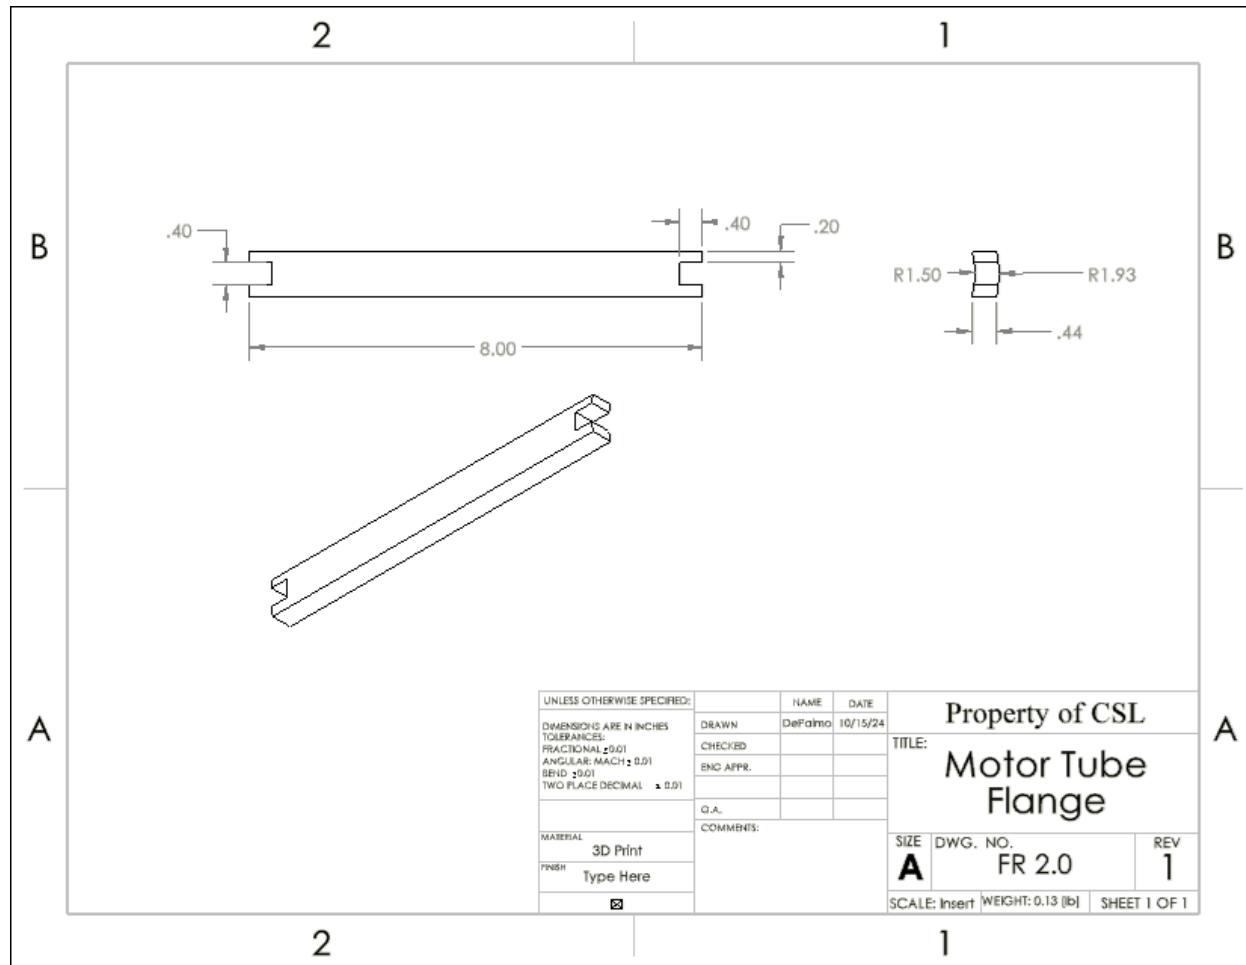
SolidWorks Drawing of Motor Retainment Flange.
